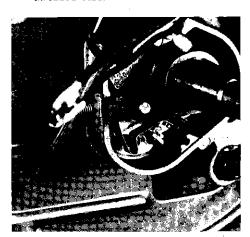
Remove the set screw at the left, bottom inside of housing so you can remove the points next.
